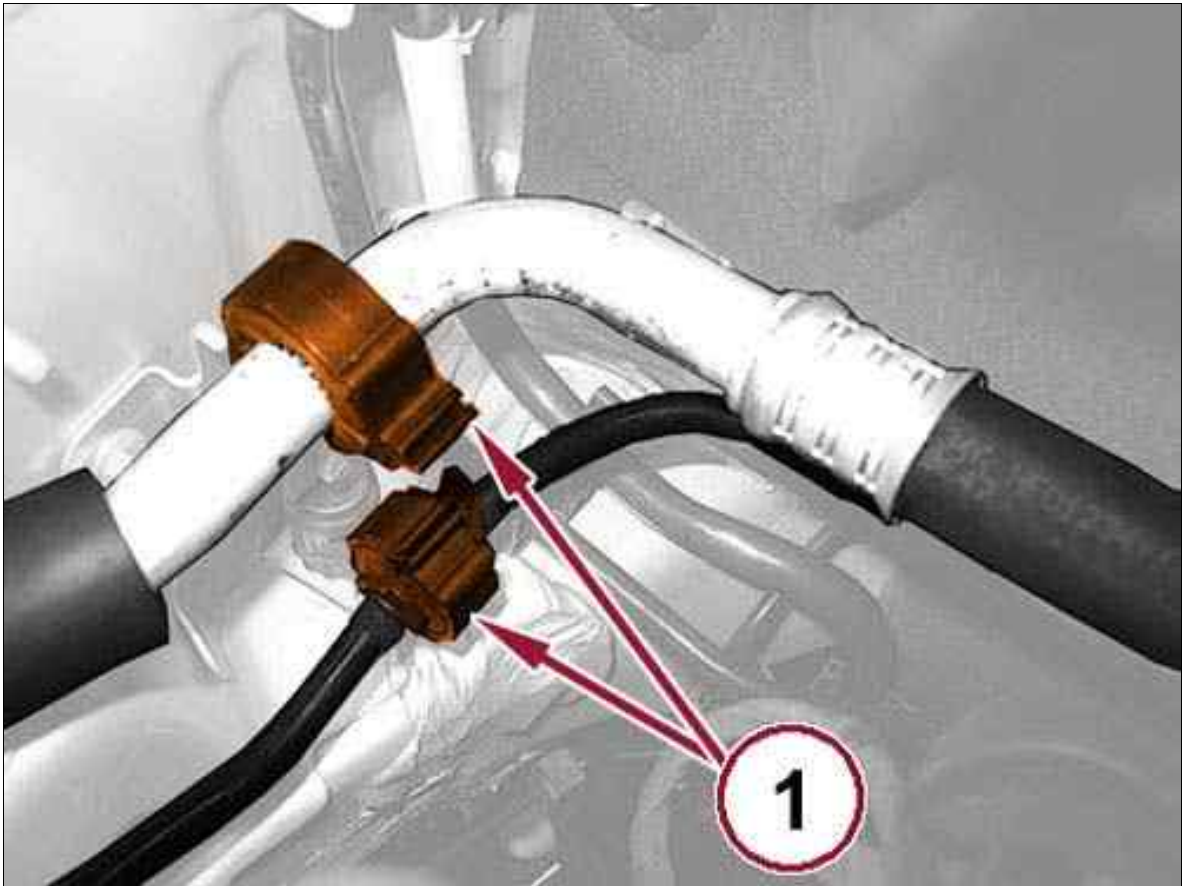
Front Fuel Delivery & Vapor Line Quick Couplings
